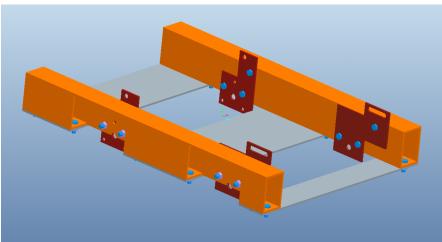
Vehicle version 1 support pieces are assembled to the main base.
